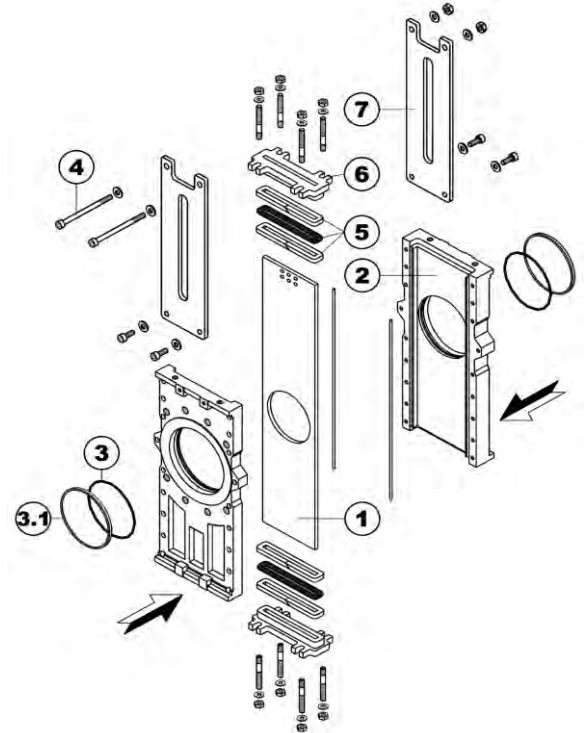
Exploded view of KGV PT series semi lugged with metallic rings (metal-metal seat)
